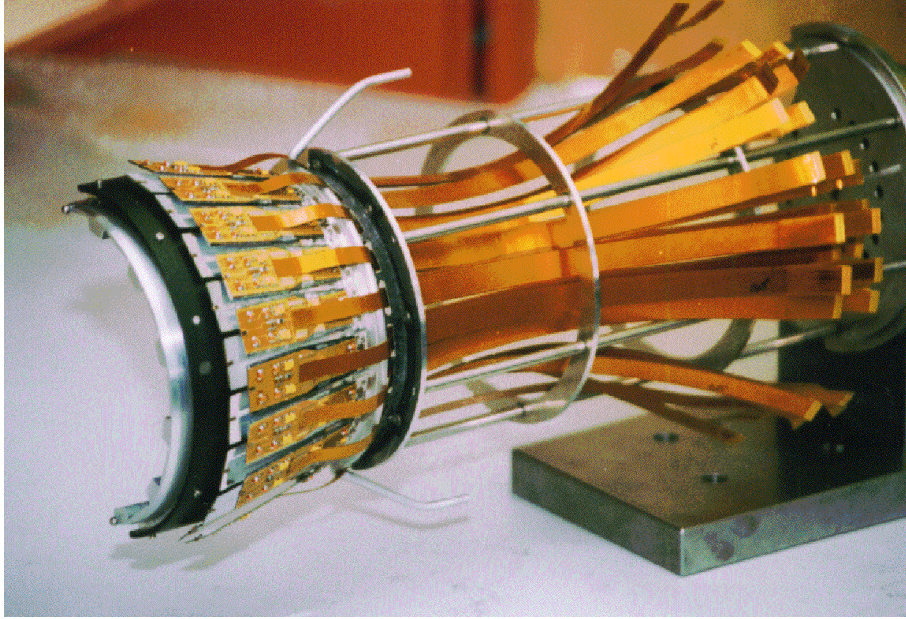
Assembly of a half-cone of the internal detector layer.
